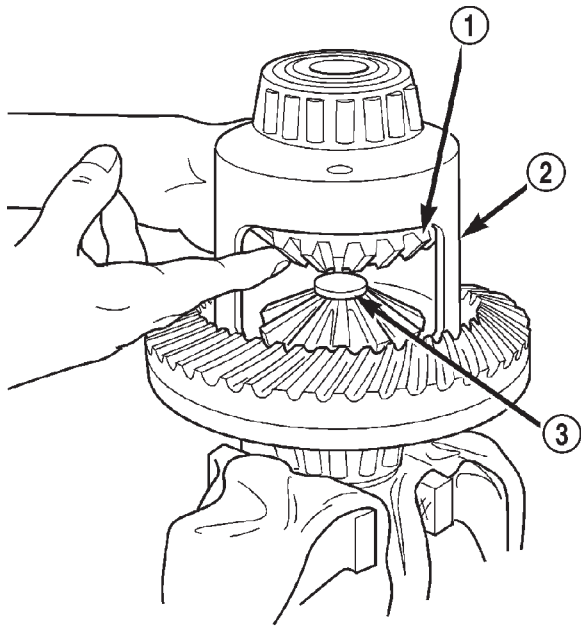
Clutch Discs & Lower Side Gear Installation
